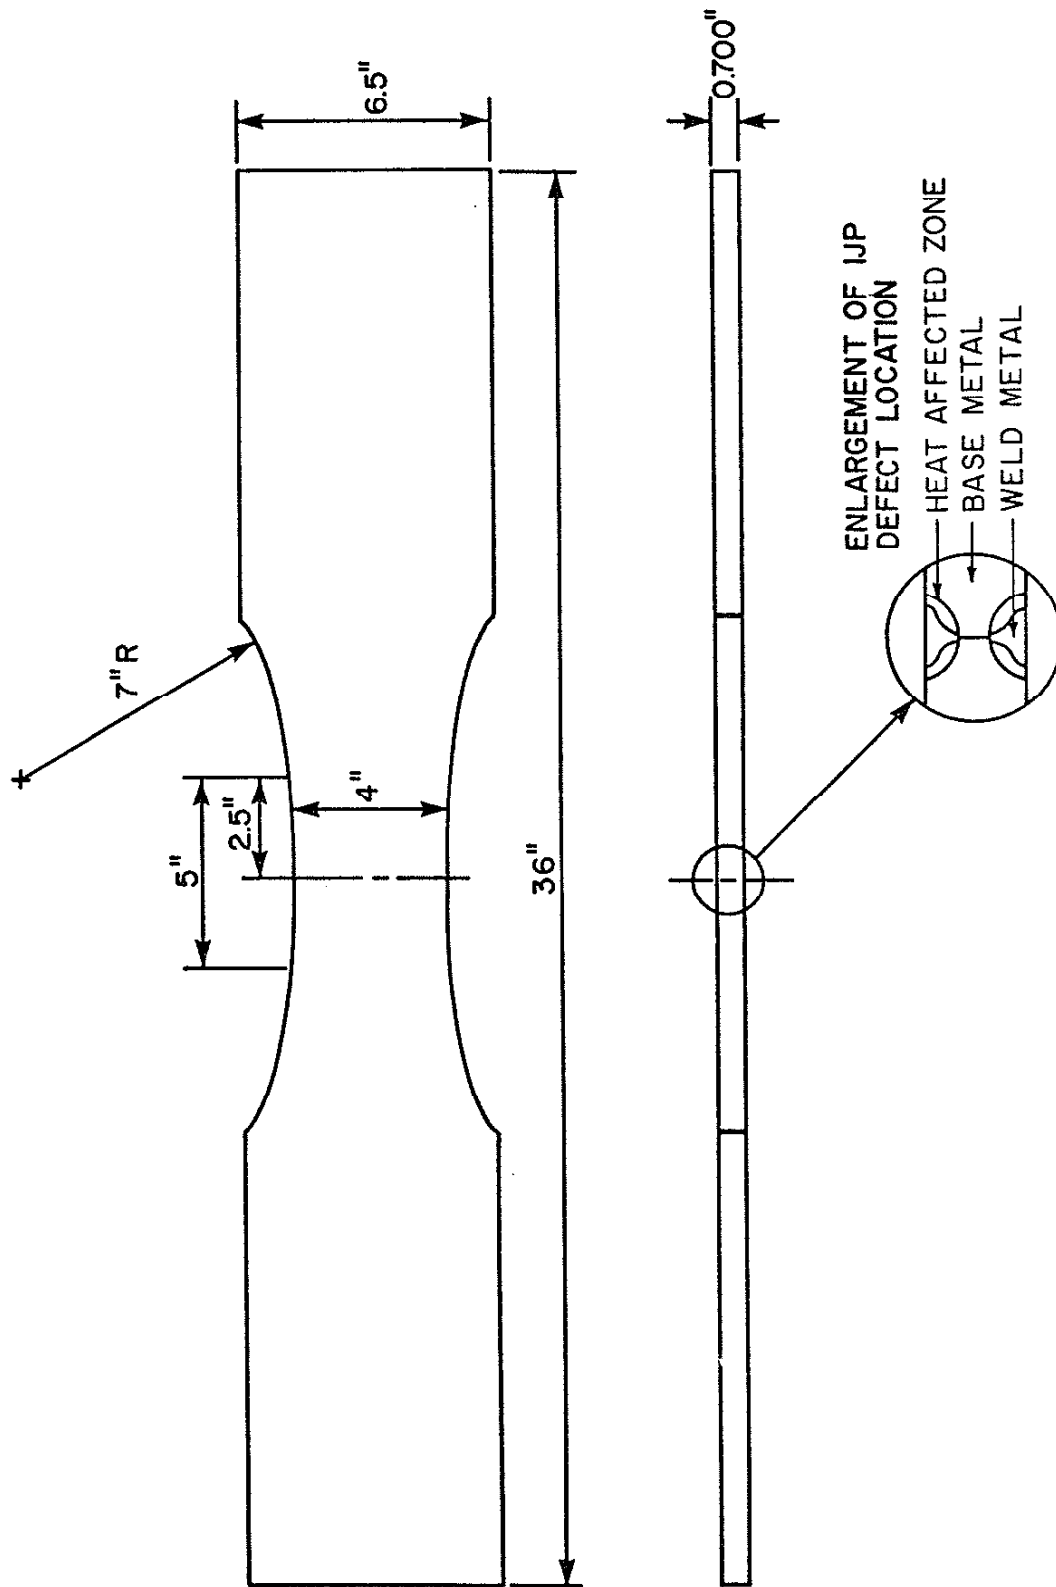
Dimensions of butt welded A514F/E110 specimens containing incomplete joint penetration discontinuities.
